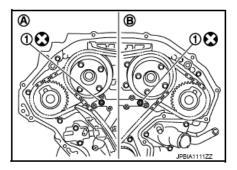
Identifying O-Ring Of Rear Timing Chain Case (Bank 1 And 2) Courtesy of NISSAN MOTOR CO., U.S.A.
